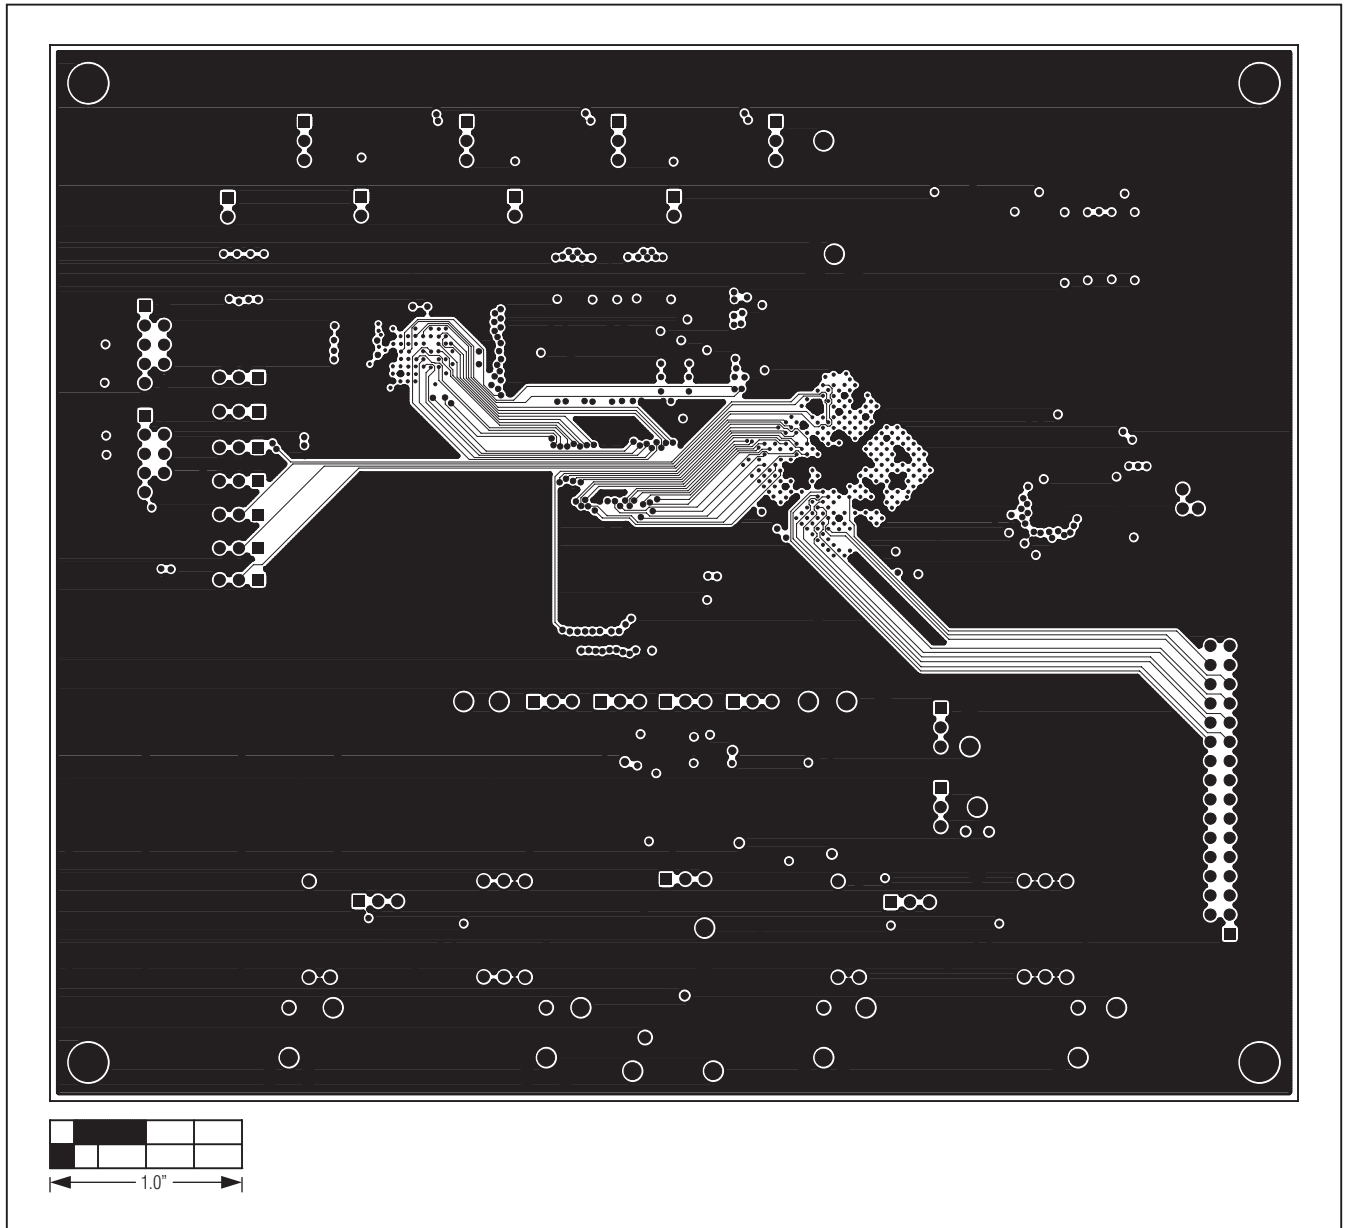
MAX11666 EV Kit PCB Layout—Layer 10
